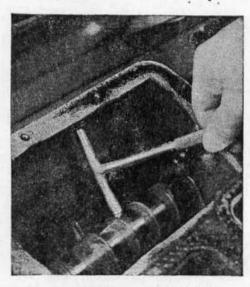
Checking valve stem length, 1940-48 V8 engines
